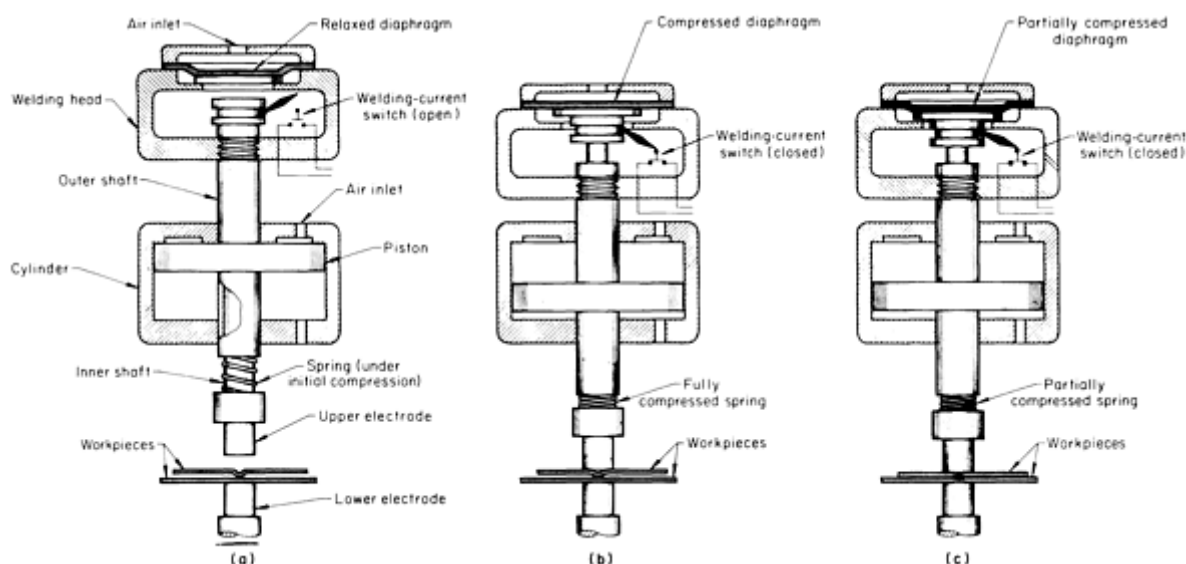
TYPICAL FAST FOLLOW-UP (LOW INERTIA) HEAD FOR PROJECTION WELDING. (A) IN OPEN POSITION. (B) IN POSITION FOR SQUEEZING AND HEATING THE PROJECTION. (C) AT INSTANT OF PROJECTION COLLAPSE AND START OF NUGGET FORMATION
